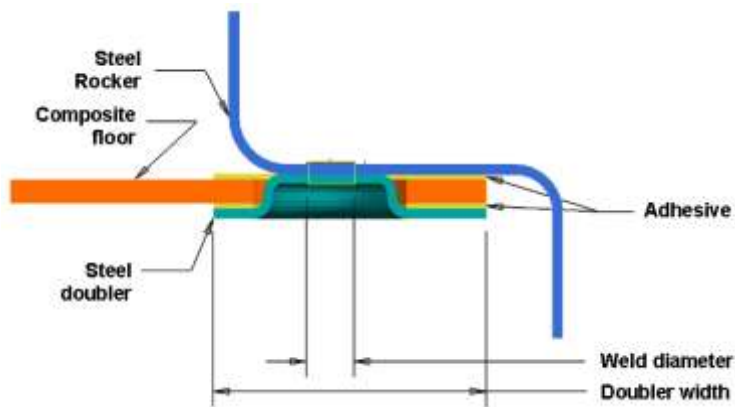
Typical Weld Bond Joint Section at Rocker (see Figure 2)
